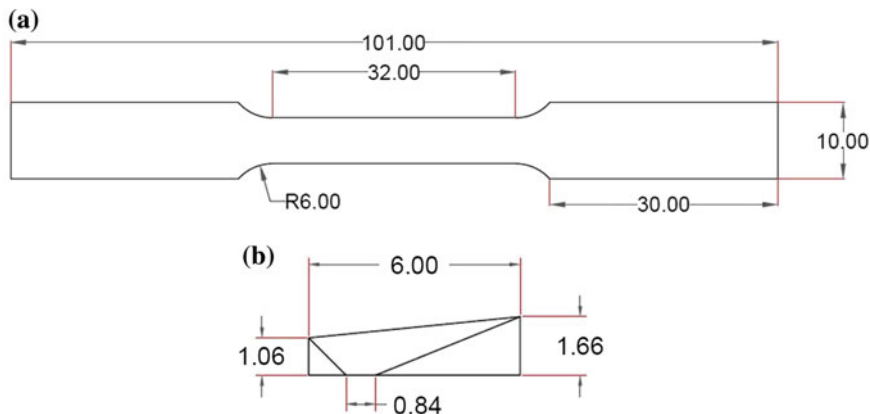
Details of the tensile test specimen, a dimensions of the specimen, b cross-section of the welded joint (all the dimensions are in mm) [18]
